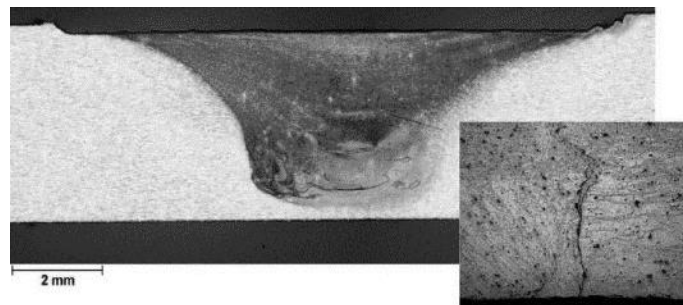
Root defect in a 4mm thick AA2024-T351 welded by FSW due an insufficient penetration of the probe [57].
